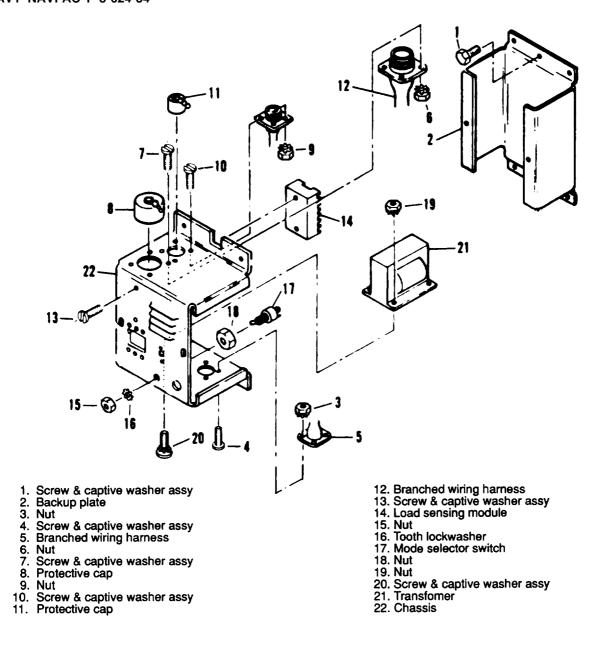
Load Bank Control Box Assembly, Exploded View
